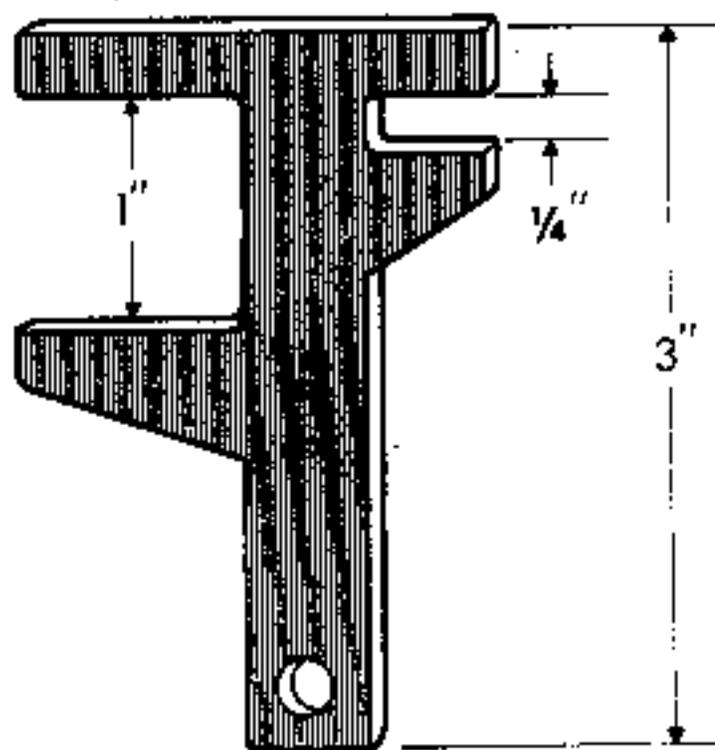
A Go-No-Go gage can be cut from 1/16 or 1/8-inch sheet aluminum. Cut the notches slightly tight and file smooth to final dimensions.
